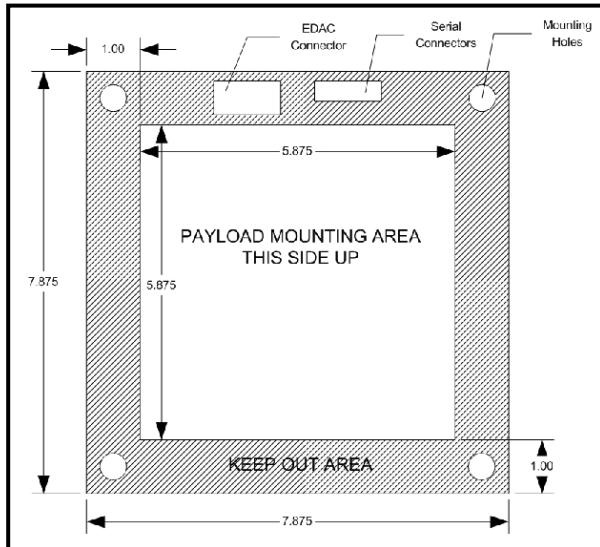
Mounting Plate for small payload (Courtesy: HASP Version 02.17.09)
